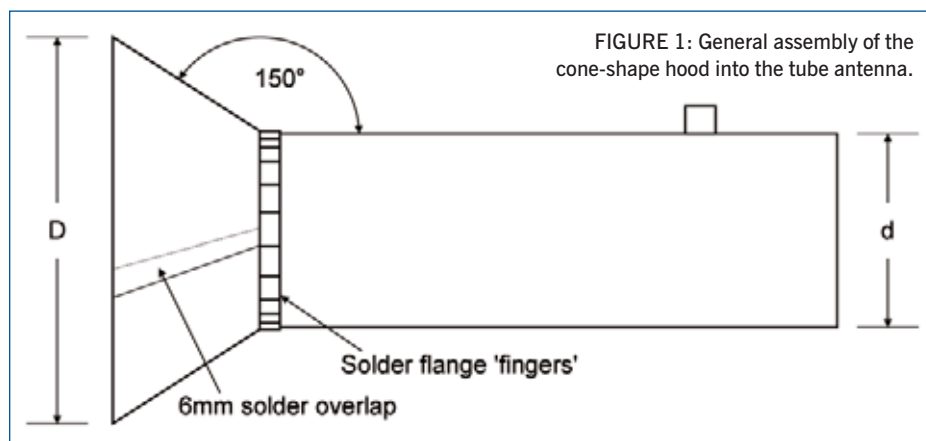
General assembly of the cone-shape hood into the tube antenna.
